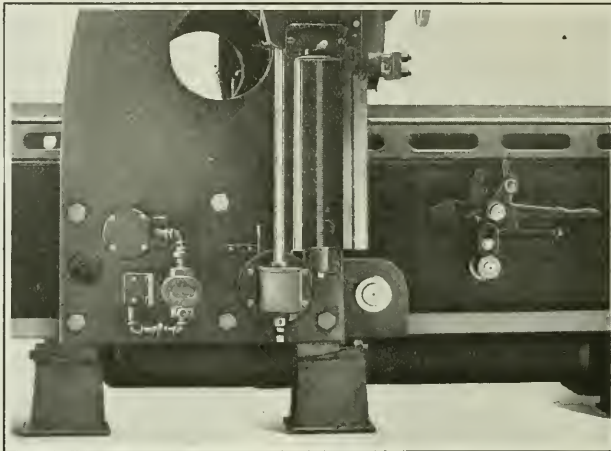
View of Left-hand Side of Machine, showing Lubricating Pump and Filter
